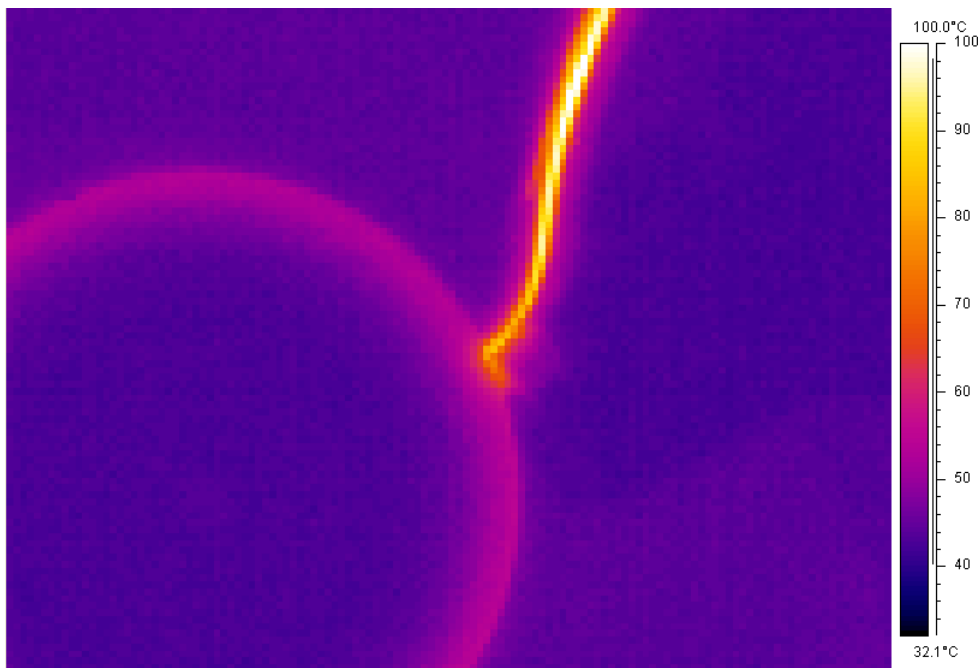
Cryogenically machined FSP sample at 0.1 mm/rev feed and 150 m/min cutting speed
